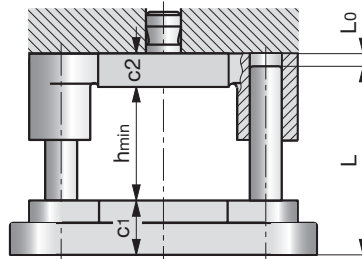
Minimum distance  $h_{min}$ . between the working surfaces when using clamping pin with threaded shank according to DIN ISO 10242-1.
